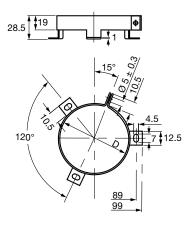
Dimensional outline of clamp for case Ø D = 76 mm
